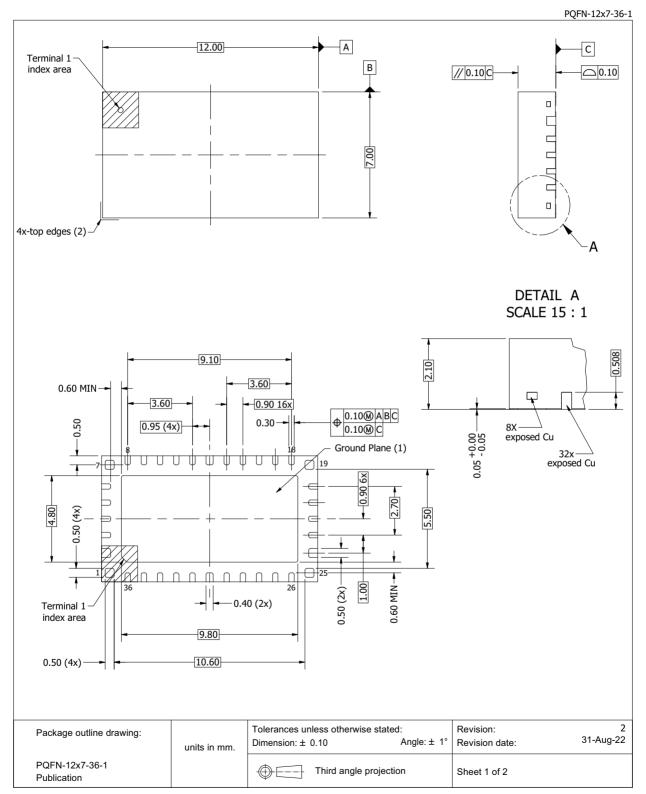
Package outline PQFN-12x7-36-1 (sheet 1 of 2)
